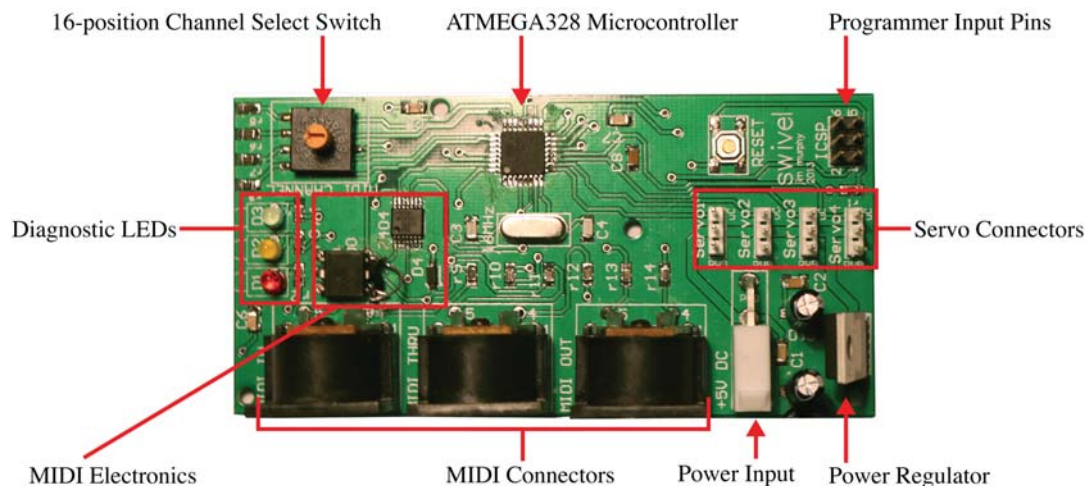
The Swivel 2 PCB assembly, with major subsections indicated.
